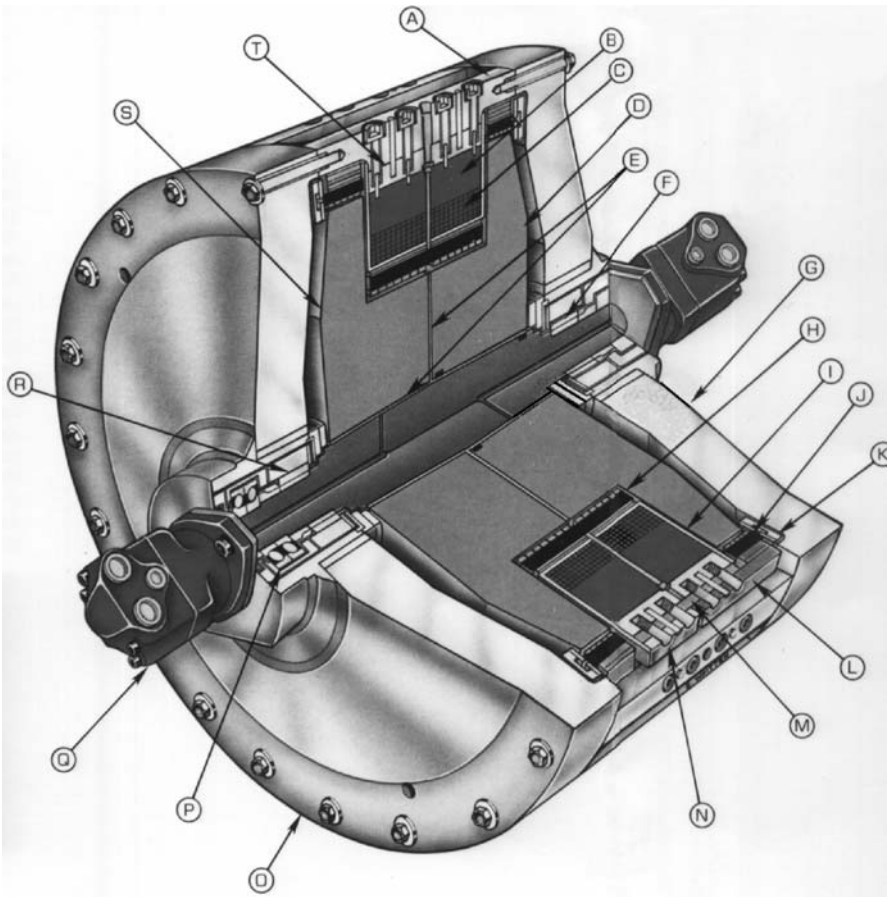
Technical details of a compact pulsed homopolar generator: A, stator support bar; B, stator iron; C, field coil; D, removable rotor section; E, ceramic insulator; F, radial bearing; G, stator support cone; H, inner brush assembly; I, compensating plate; J, outer brush assembly; K, outer brush manifold; L, output terminal-outer brush; M, insulator; N, output terminal-inner brush; O, stator support cone; P, thrust bearing; Q, hydraulic motor; R, radial bearing; S, permanent rotor section; T, inner brush air manifold (OIME Inc., Odessa, Texas)
